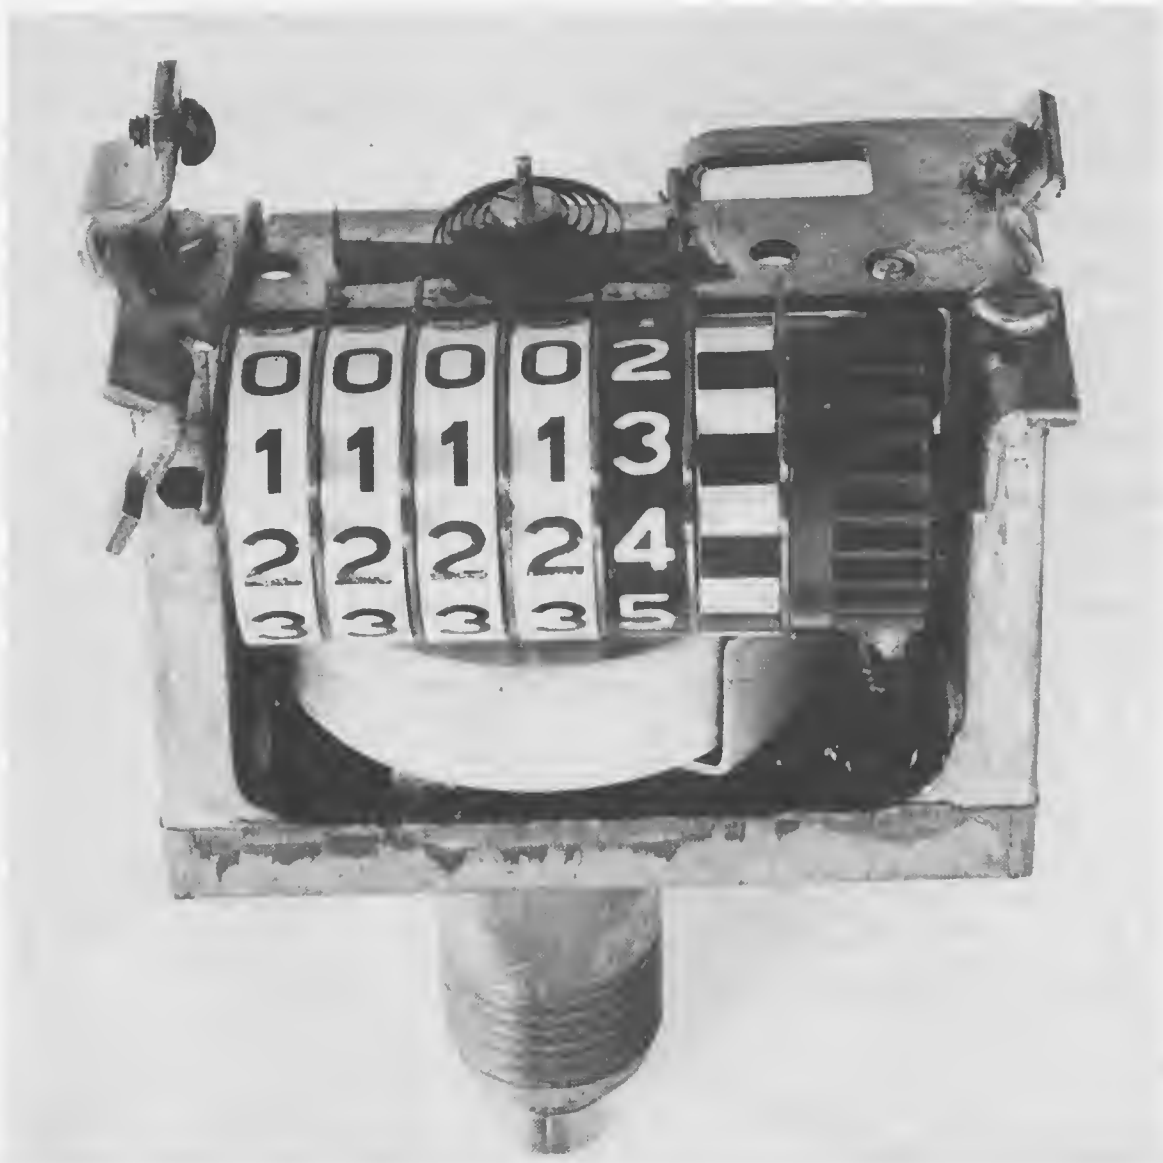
Exhibit A-I SPEEDOMETER ASSEMBLY WITH ODOMETER IN PLACE
